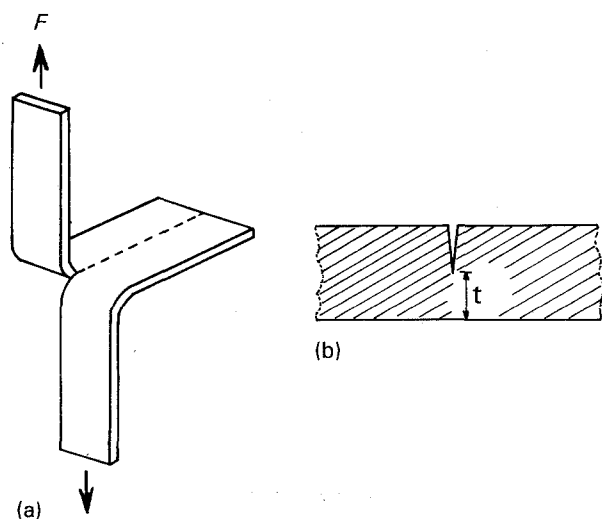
(a) Tear test-piece and (b) cross-section of a test-piece.
